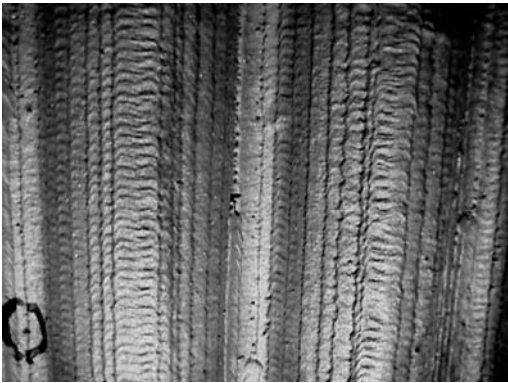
Close-up view of alloy 625 overlay on the waterwall of another RDF boiler after 10 years of service. Shown in the photograph are two tubes and a membrane. Courtesy of Welding Services Inc.
